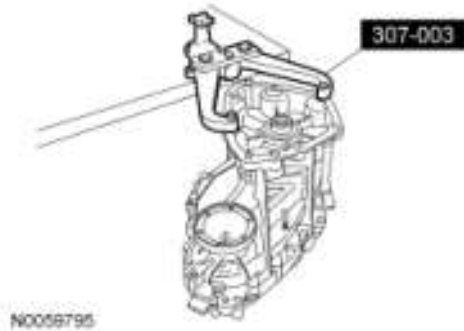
Securing Transfer Case To A Bench Using Special Tool (307-003)
